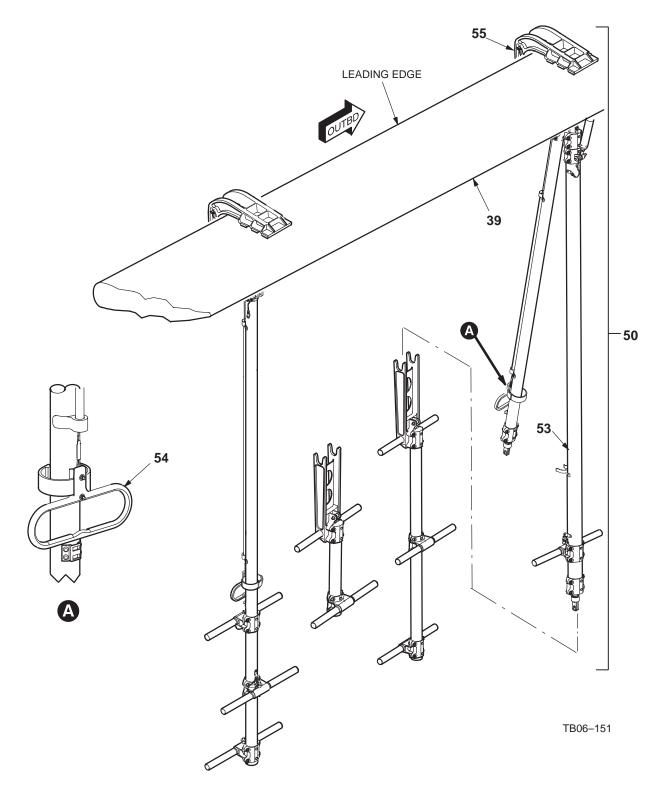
Installation of Blade Securing Pole on L/H AFT Main Rotor Blade
